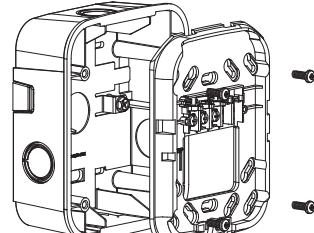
ATTACH MOUNTING PLATE TO BACK BOX
